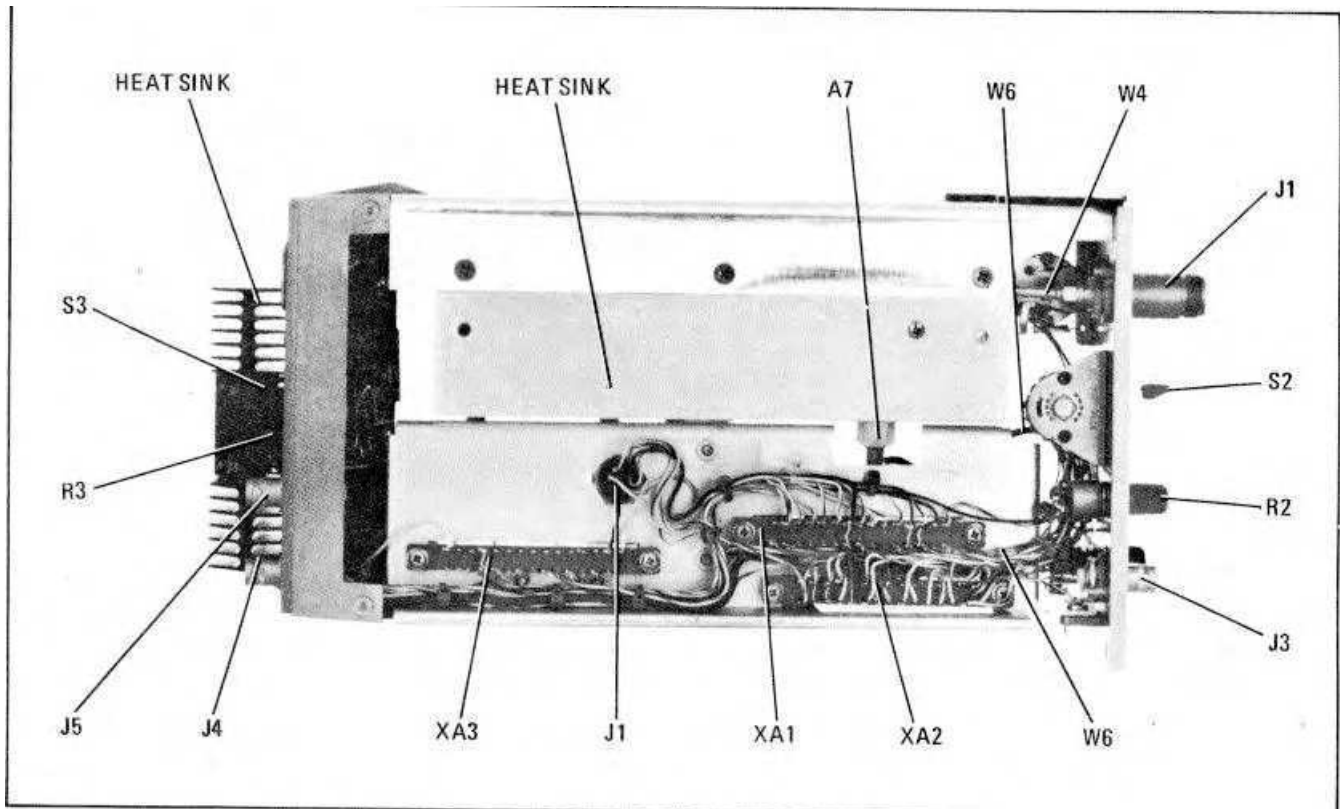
Location of Major Assemblies, Bottom View (Option 001)
